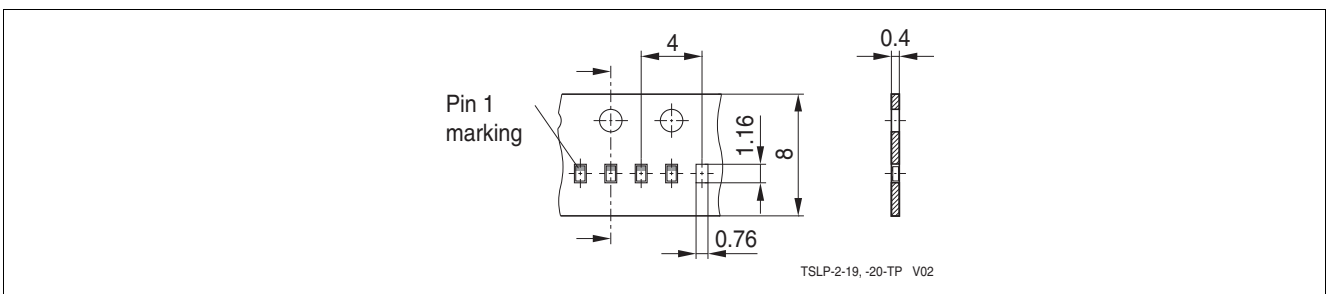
TSLP-2-20 Packing (dimension in mm)
